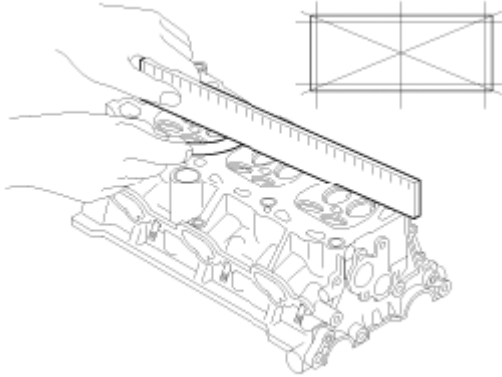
Measuring Flatness Of Cylinder Head Gasket Surface
